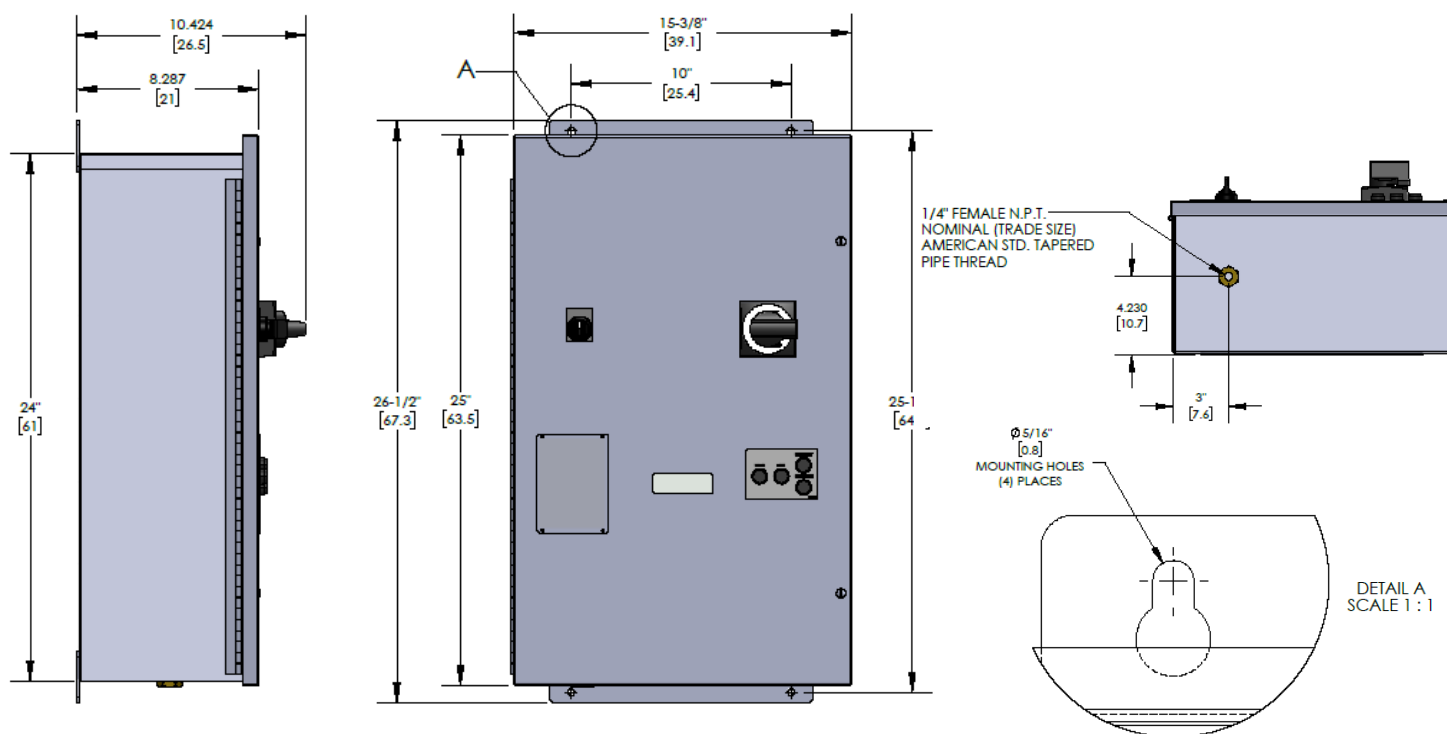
Panel Specifications; Including Dimensions for Mounting and Plumbing
